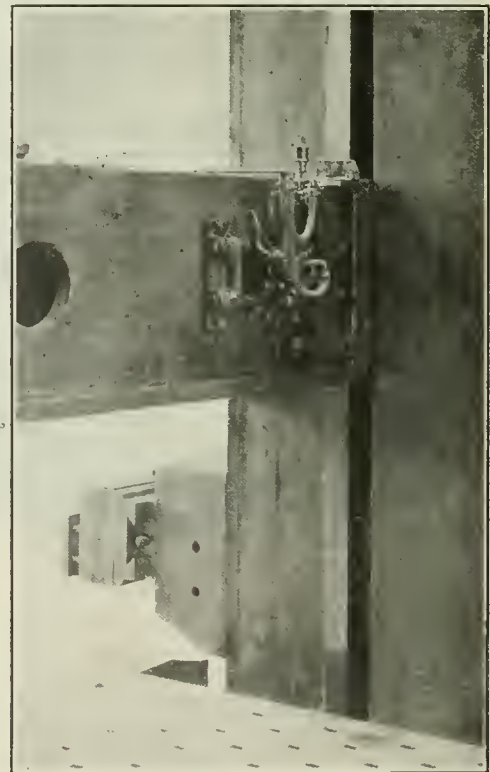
PNEUMATIC DEVICE FOR CLAMPING PLANER CROSSRAIL
